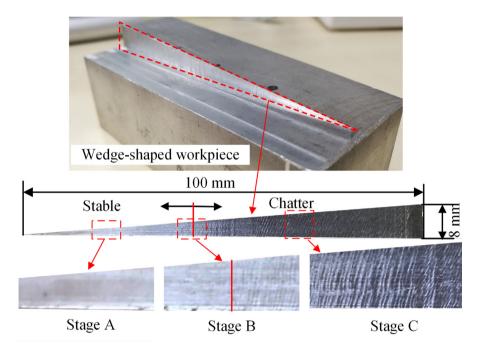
Surface finishes of machined workpiece (wedge-shaped).
